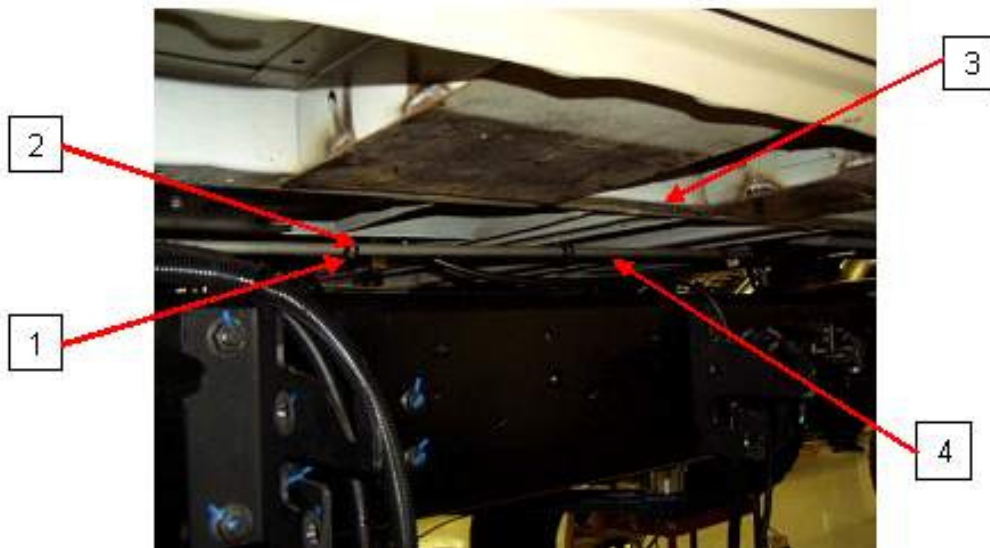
Parking Brake Cable Bracket and Cable Mounting
